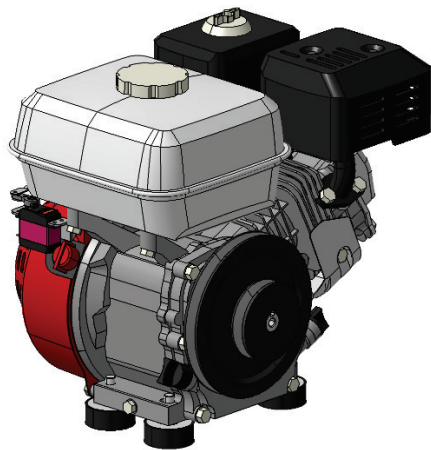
Internal combustion engine subassembly with servo motor, rubber bumpers, and a double pulley
